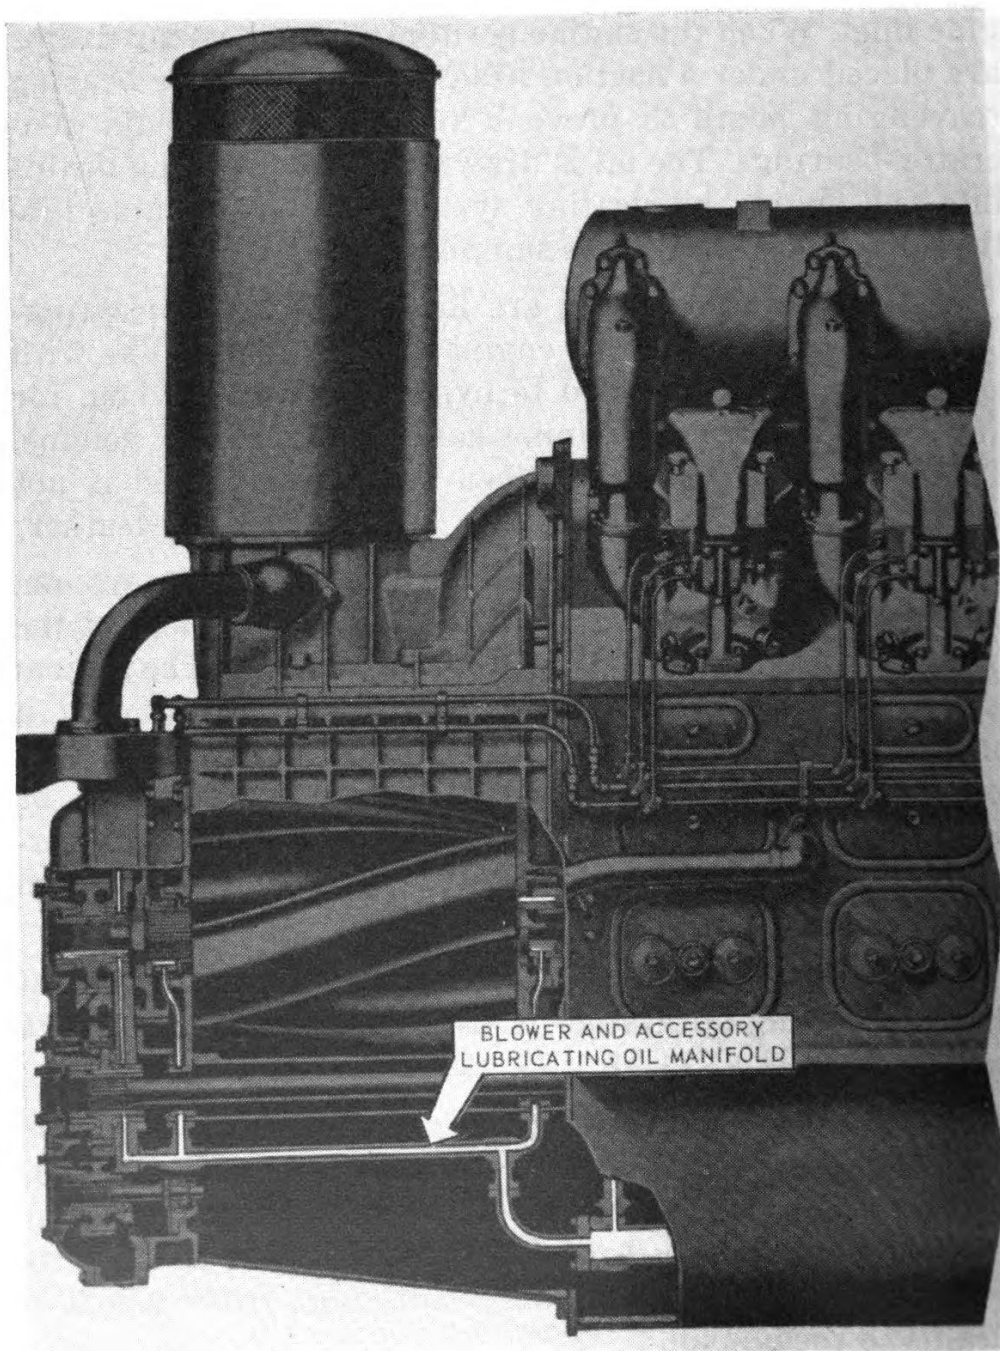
Engine lubricating-oil system (GM 278A).
